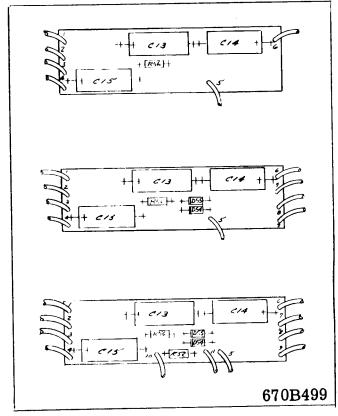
Printed Circuit Board Assembly for SDG, SDG-1,2,3 & 4 Relays
